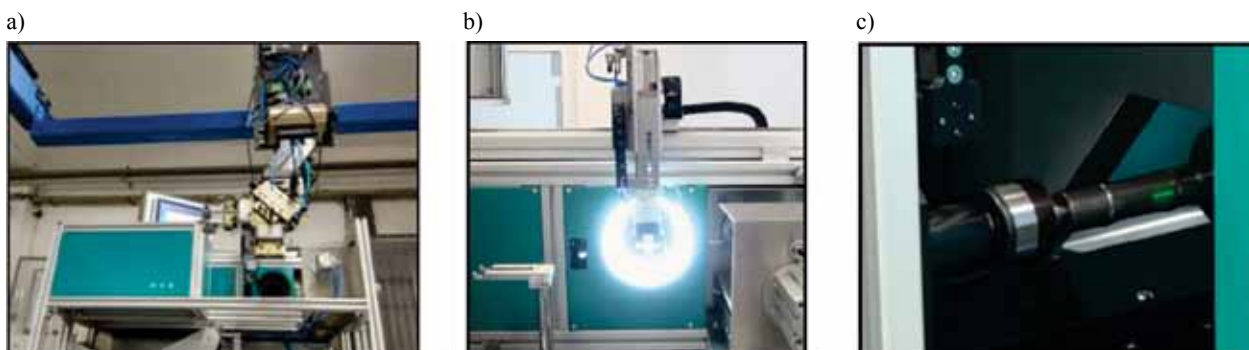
Prototype optomechatronic automatic product inspection system [18]: a) general view at the workplace, b) inspection of the shaft face, c) measurements of the side surface of the shaft
